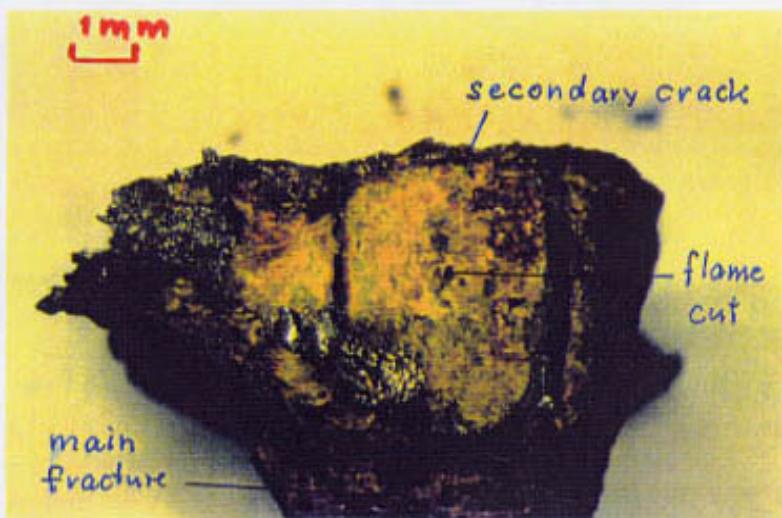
Sample of hinge plate material/weld from recovered bushing
